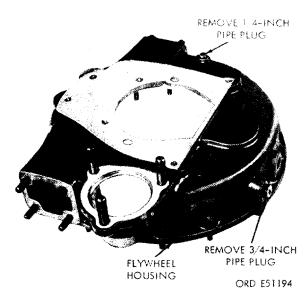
REMOVING OR INSTALLING PIPE PLUGS (LATE MODEL ENGINES).
